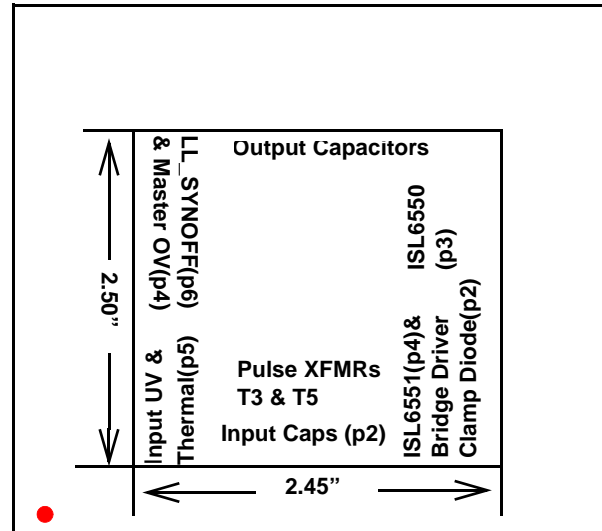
COMPONENT PLACEMENT OUTLINE ON BOTTOM LAYER
